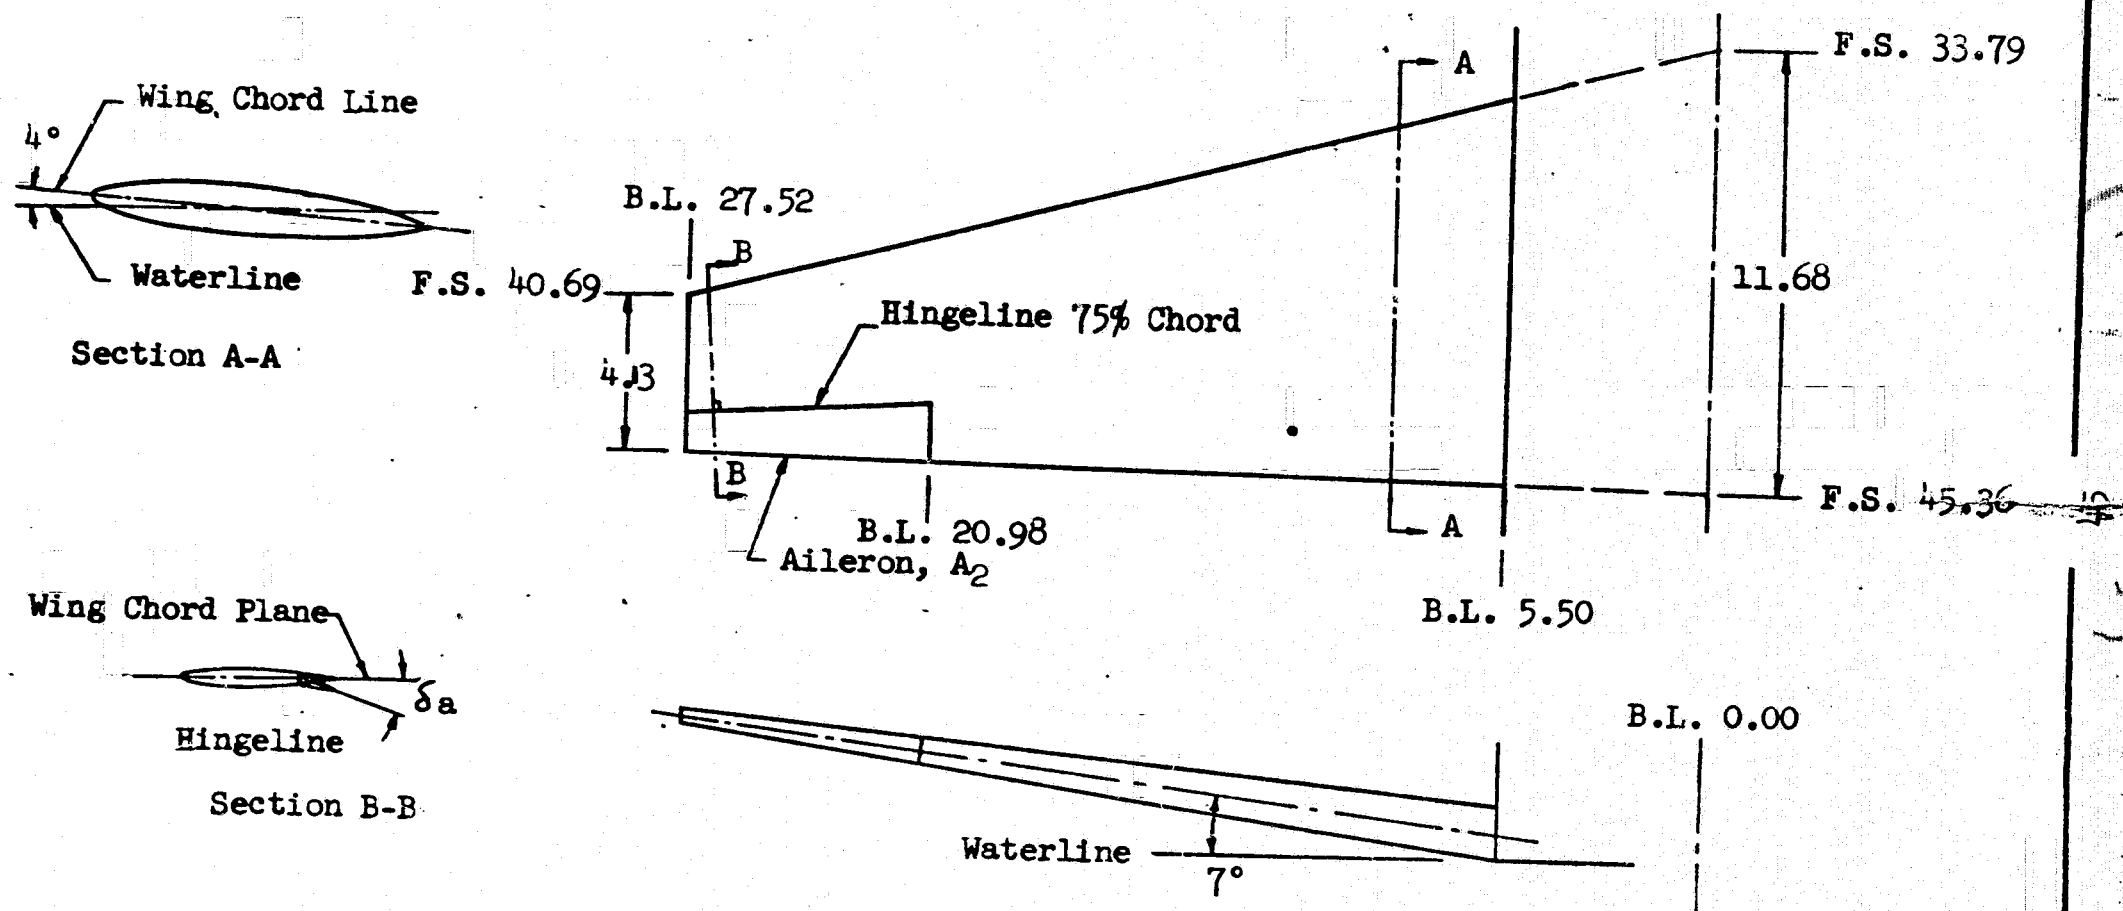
DRAWING OF WING W1 AND AILERON A1
